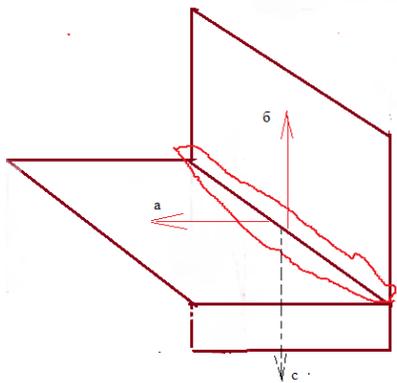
Transverse shrinkage stresses appearing in the welding joint.
